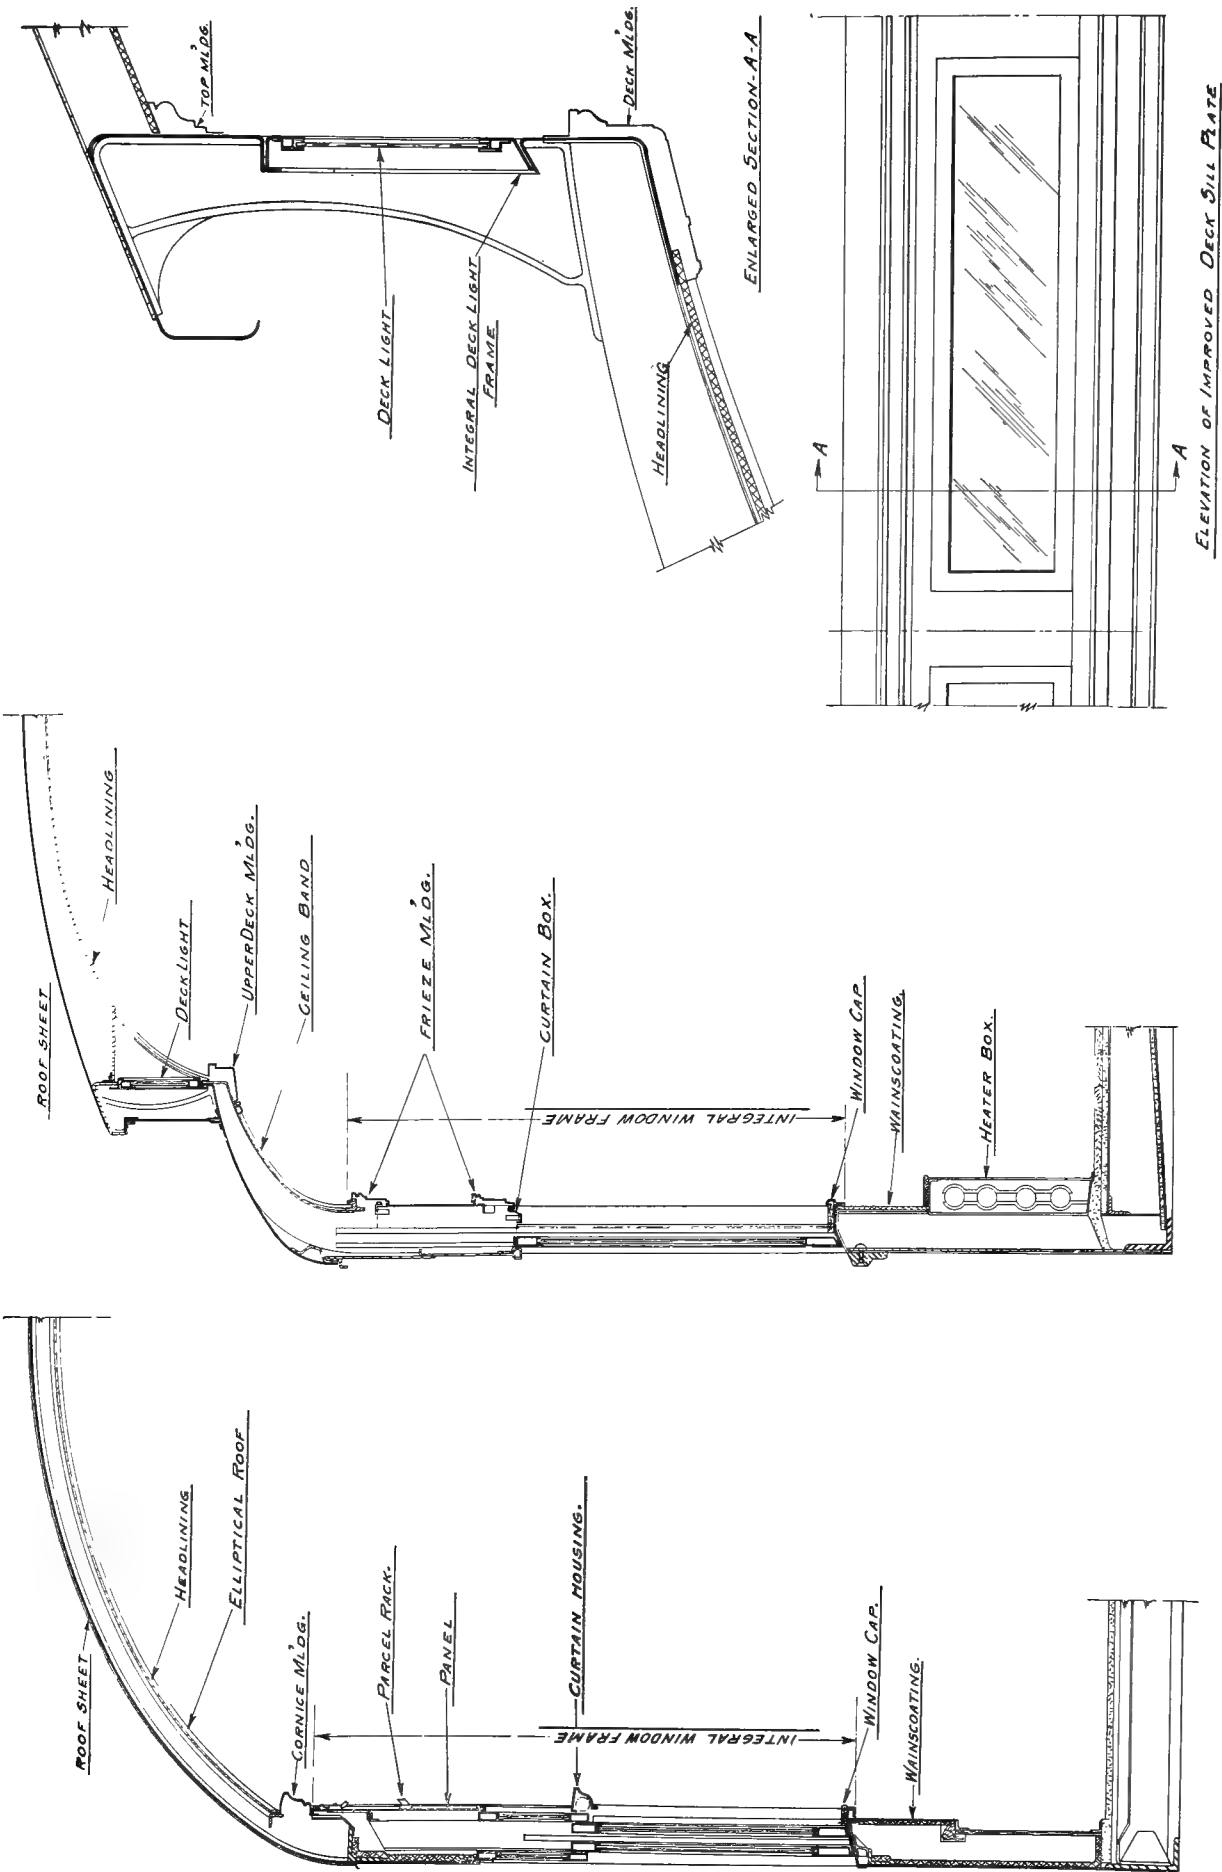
Interior Finish for Steel Passenger Train Cars. The Hale & Kilbourn Company.
